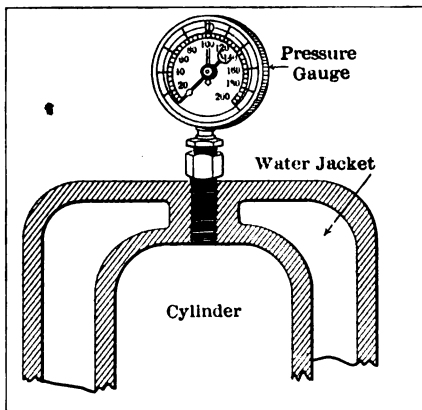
Manner of inserting the pressure gauge in spark-plug hole to measure compression
